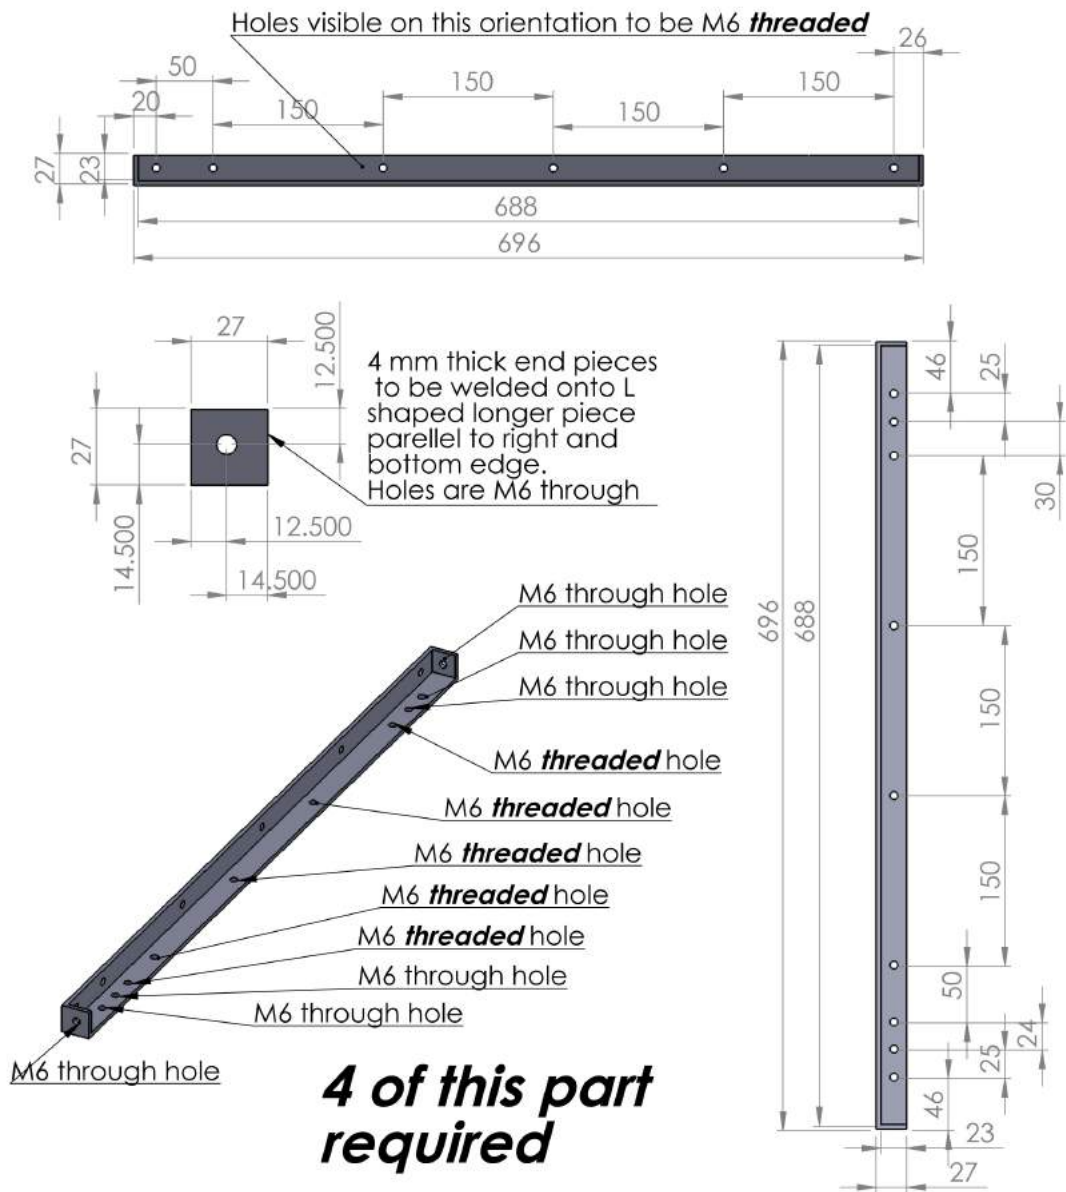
The corner posts of the Faraday cage. The threaded holes are for installing the main panels and the through holes are so that these corner posts can be connected to the bottom and top corner pieces which hold the frames together.
